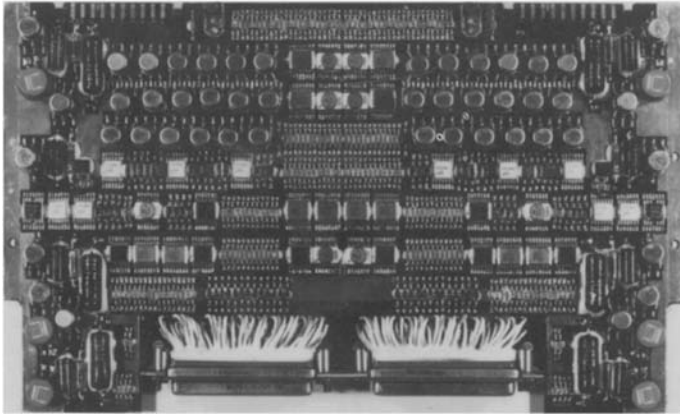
Space shuttle printed wiring board coated with RTV silicone.
